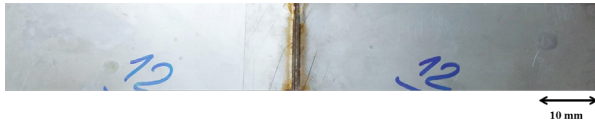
Close view of welded sample in butt joint configuration.
